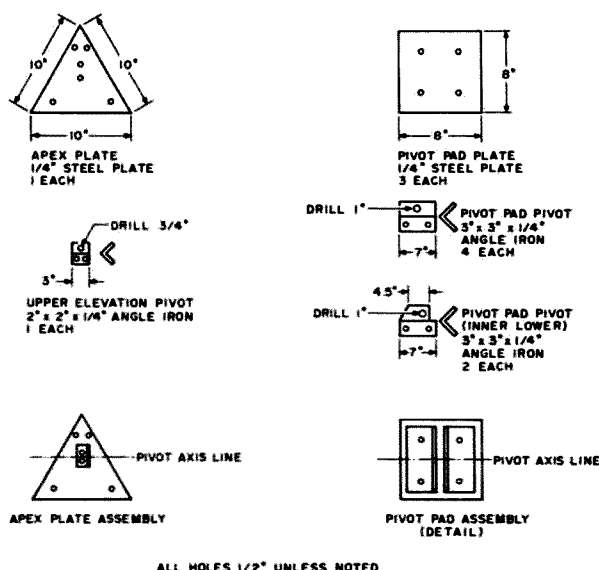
Apex plate and pivot pad cutting and assembly detail.
